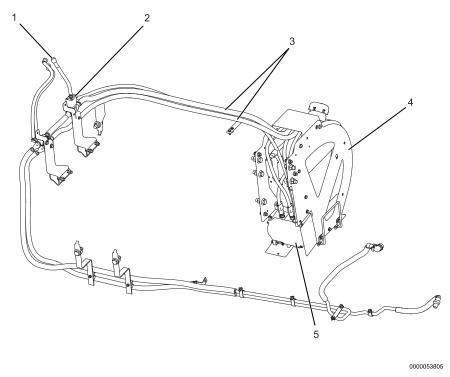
Diesel Exhaust Fluid (DEF) Tank Wiring Harness.
